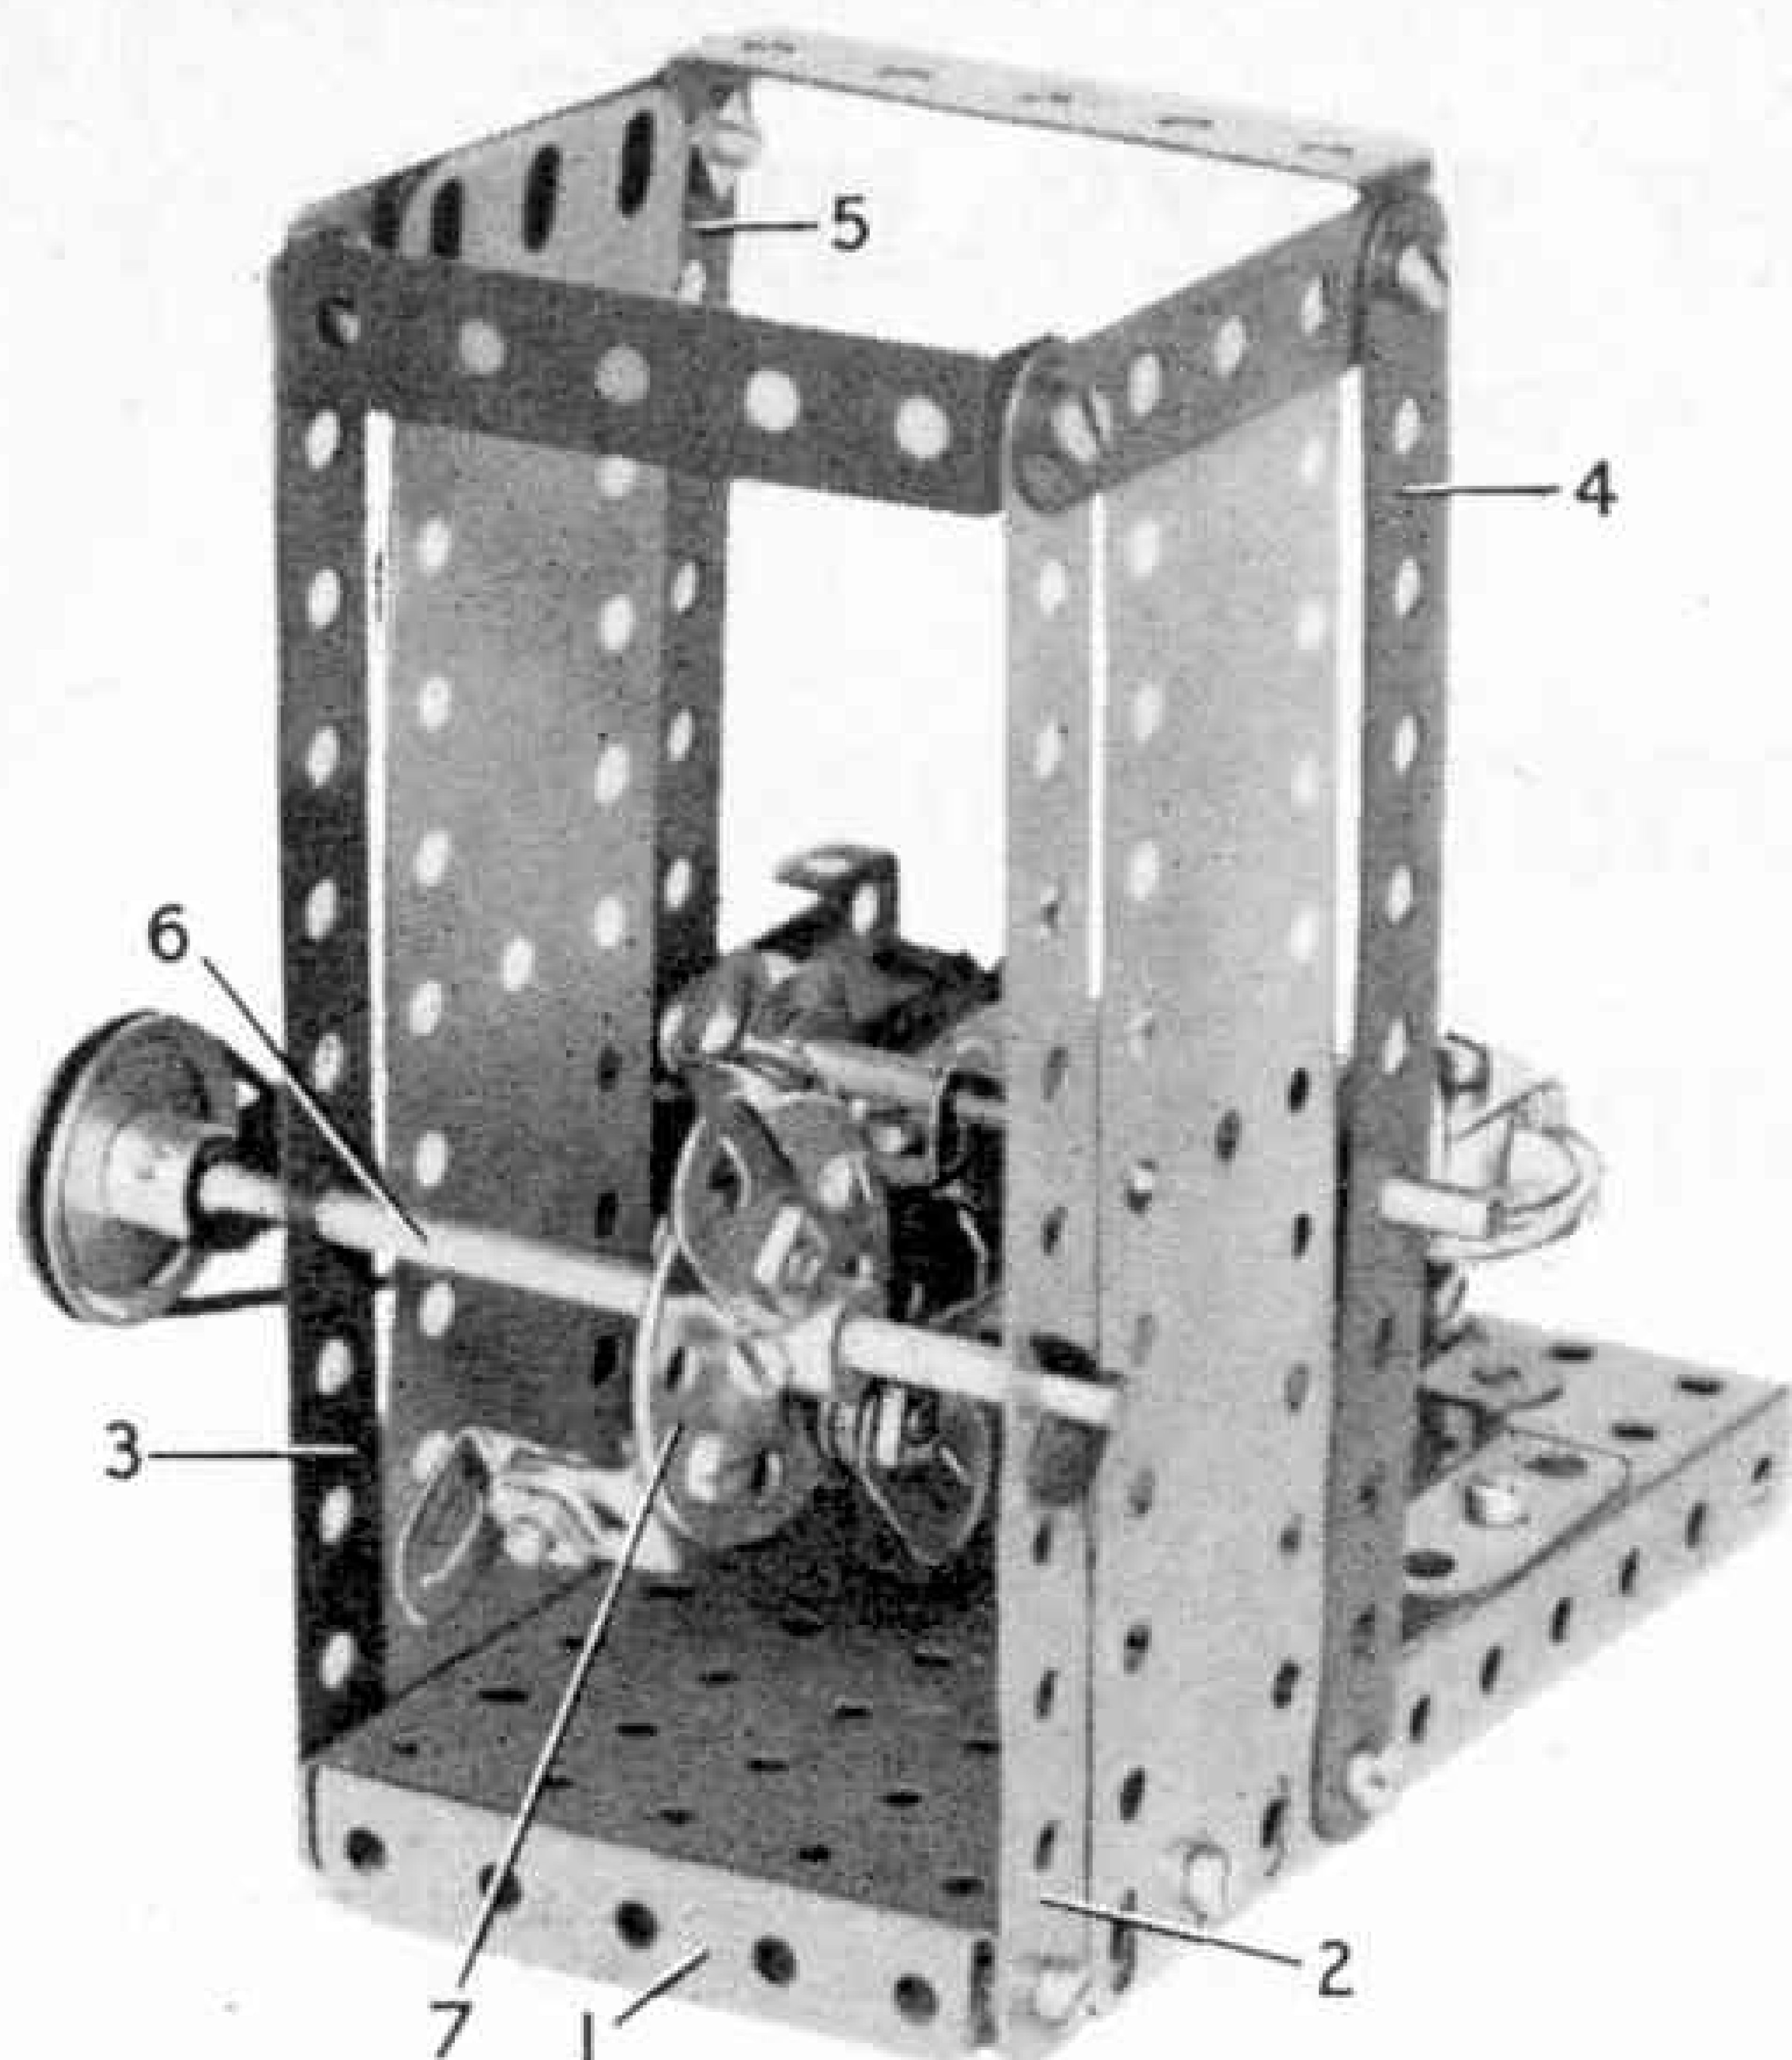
A novel Mechanical Hammering Machine equipped with twin hammers.
